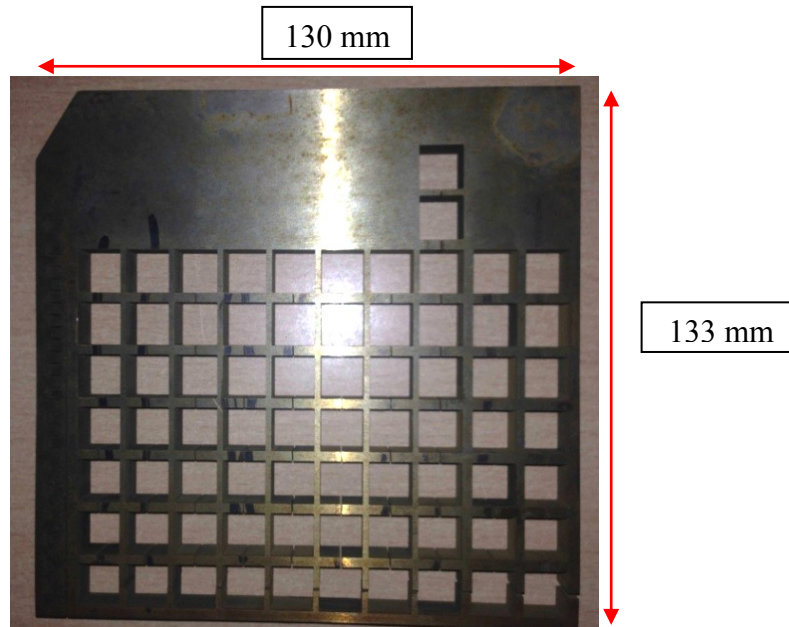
Dimensions of Workpiece, Thickness 10 mm
